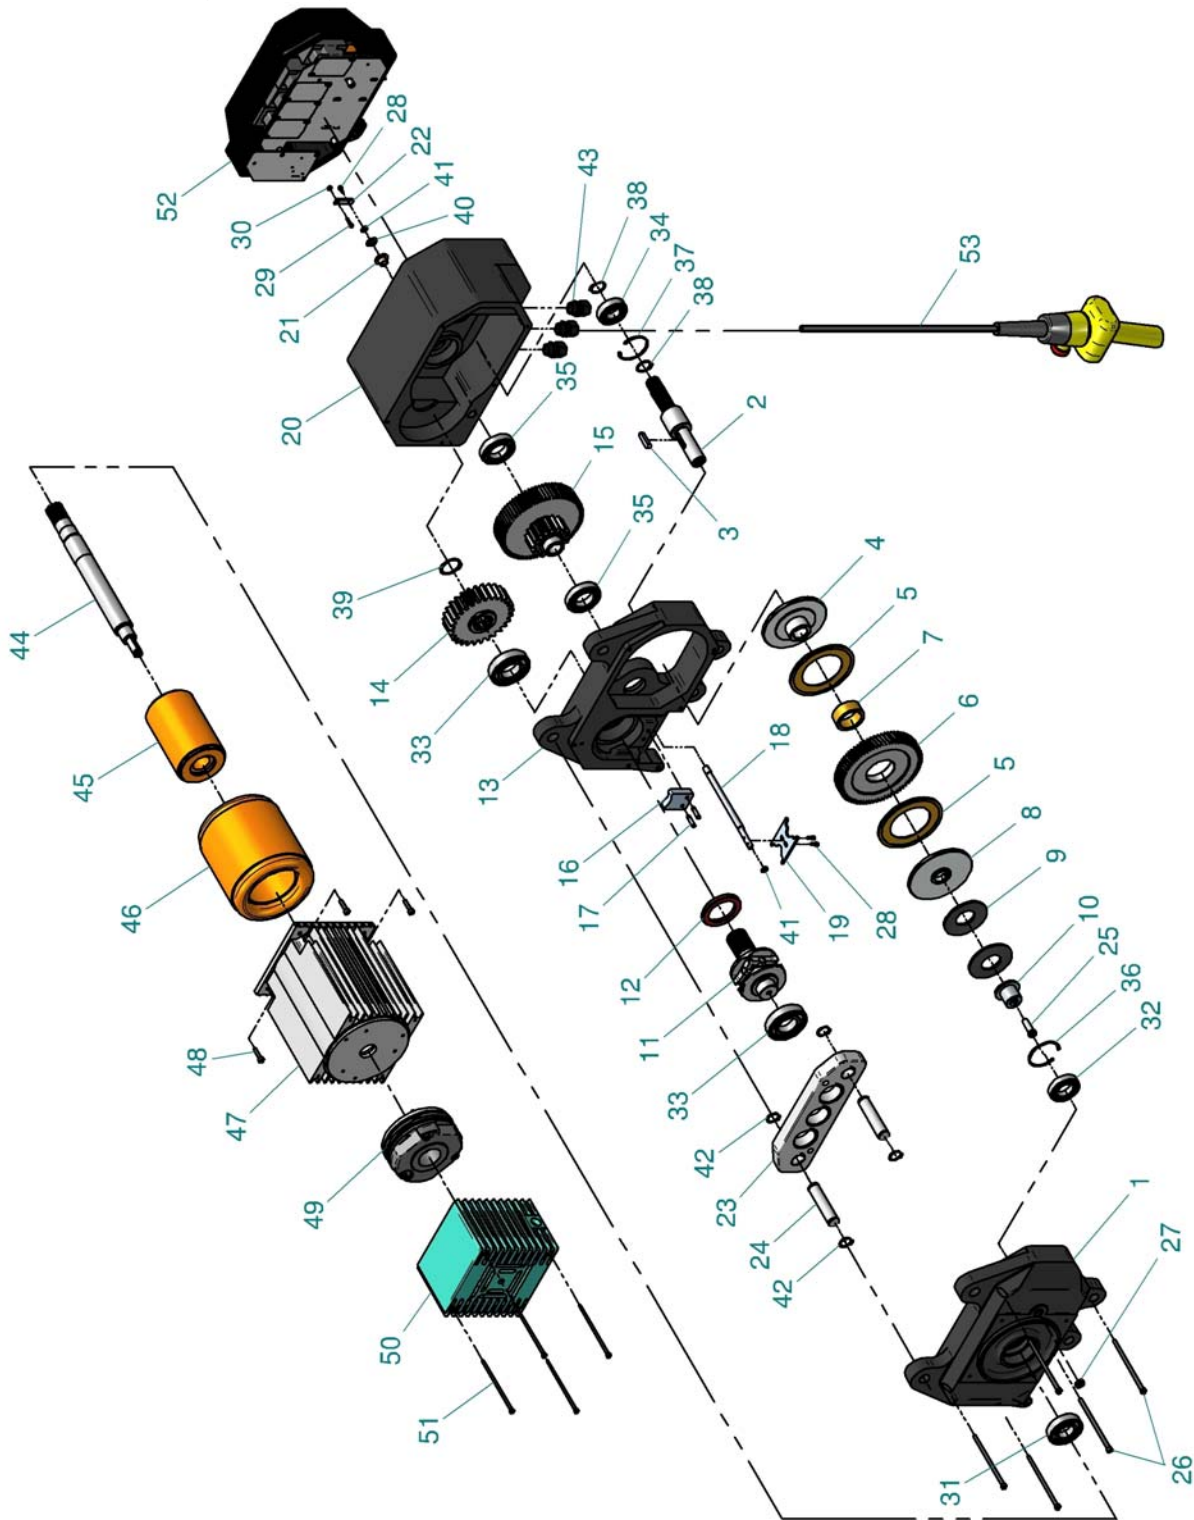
Hoist Exploded View (LX3 Version 'B')
